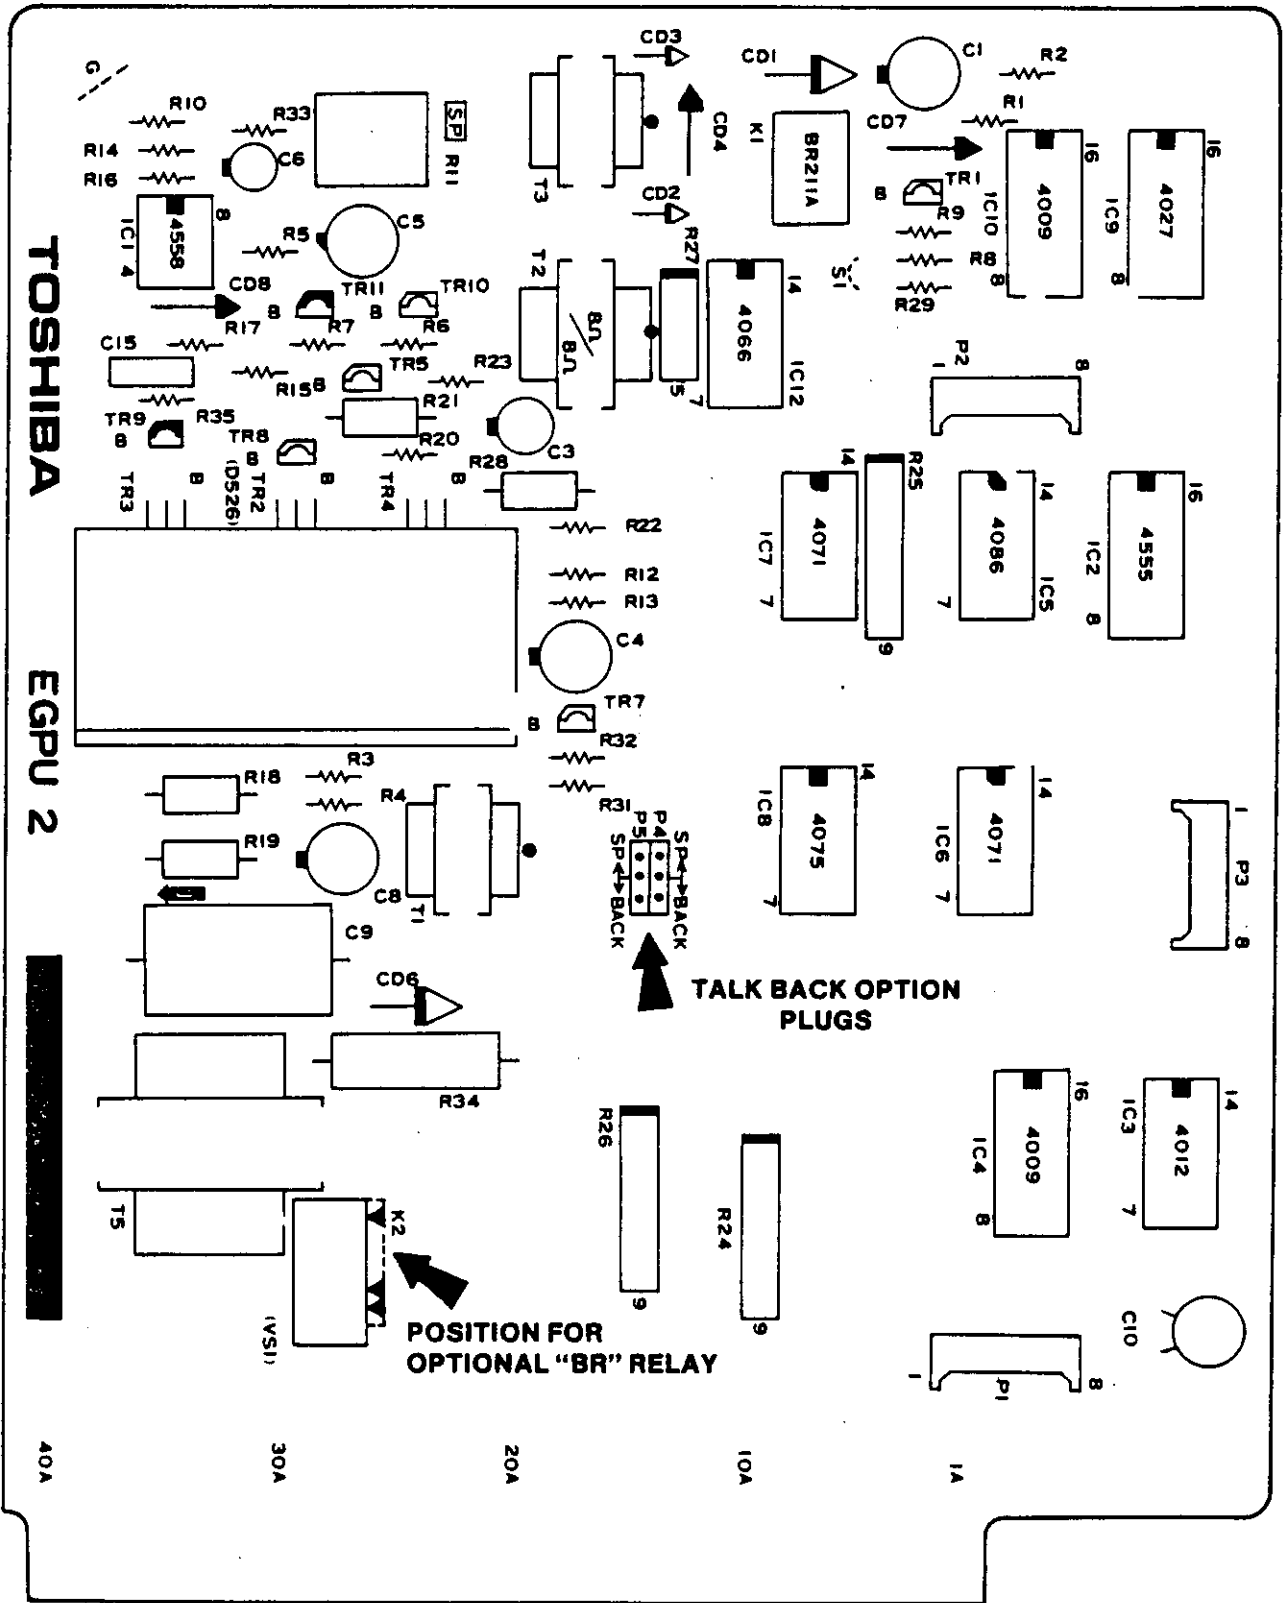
EGPU PCB PHYSICAL LAYOUT
